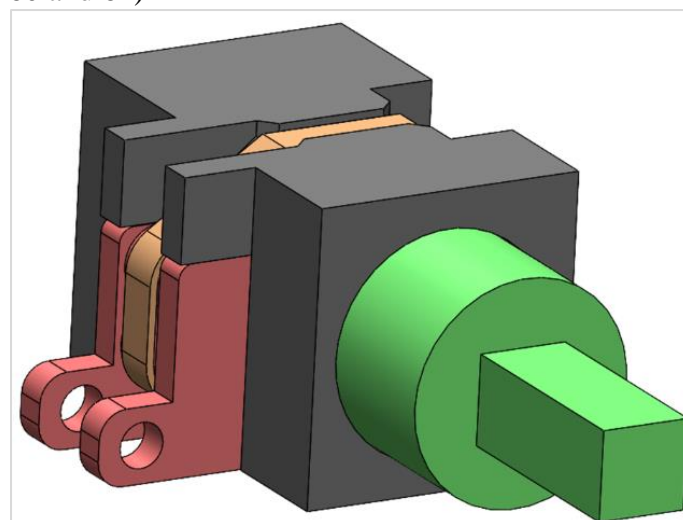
Assembly of the Mechanism with the Elastic Bands
